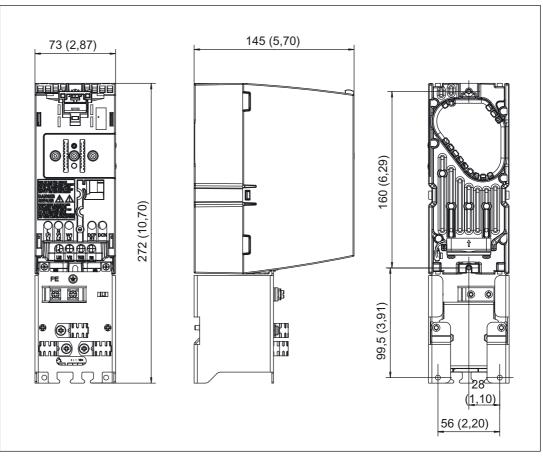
Dimension drawing of PM340 Power Module with Screening Kit, frame size FSA, all dimensions in mm and (inches)
